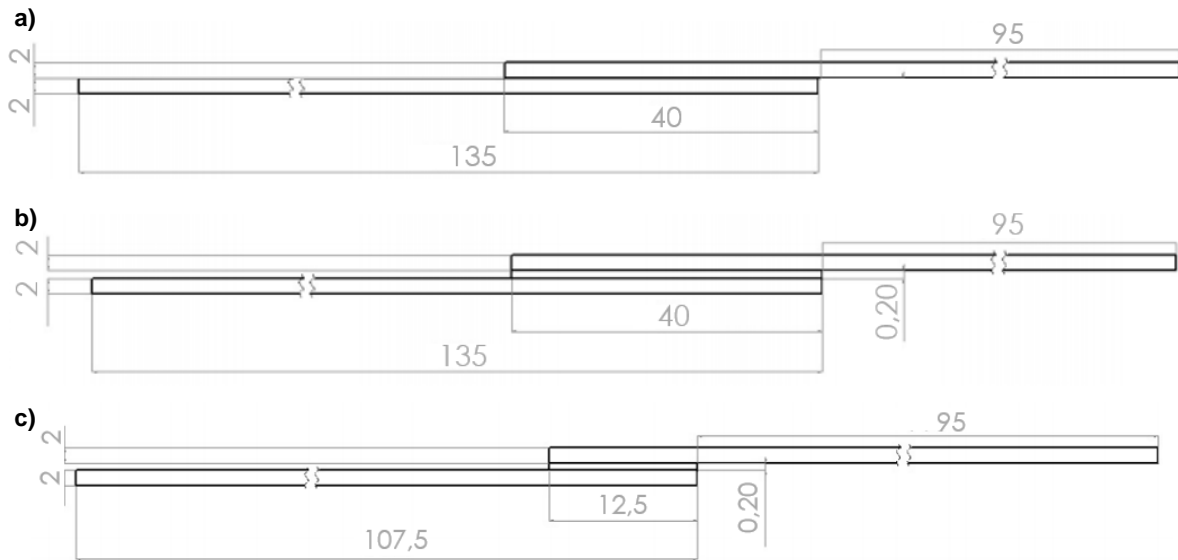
Joint cross section (not to scale): a) FSW 40 mm overlap, b) Hybrid and AB 40 mm overlap and c) AB 12.5 mm overlap.
